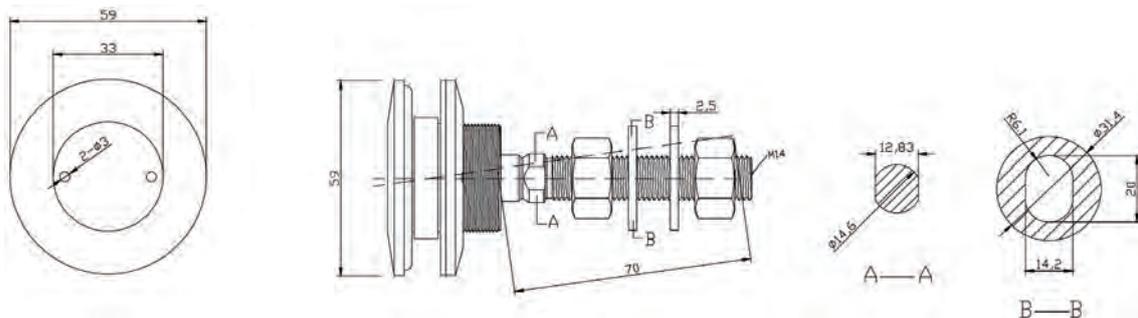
Articulated point support with fixture front plate RT 12-21 M14: drawing
